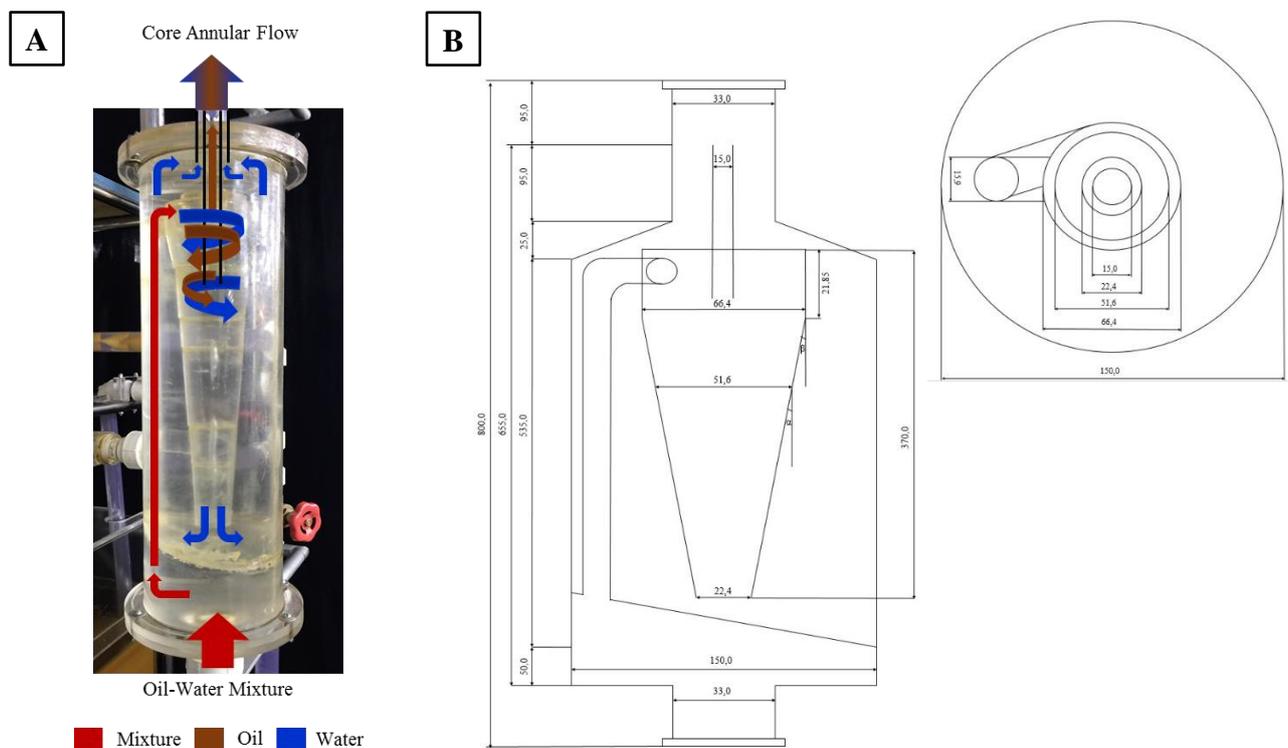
A) Hydrocyclone picture with the fluid paths during operation. B) Hydrocyclone detailed drawing, front and top views with the dimensions in mm.
